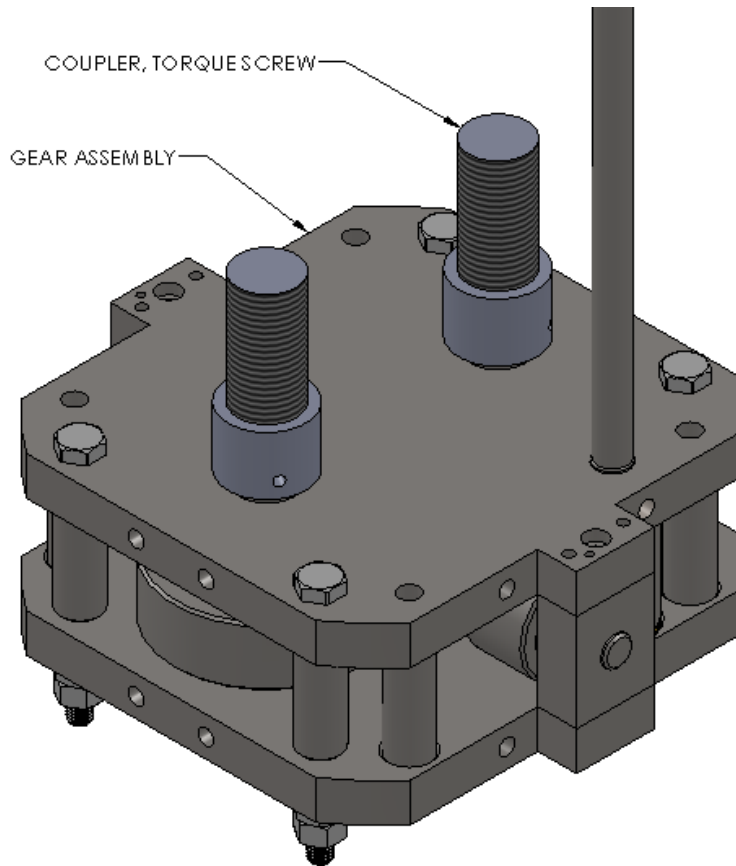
Torque screw are custom designed with right and left threaded ACME threads.
